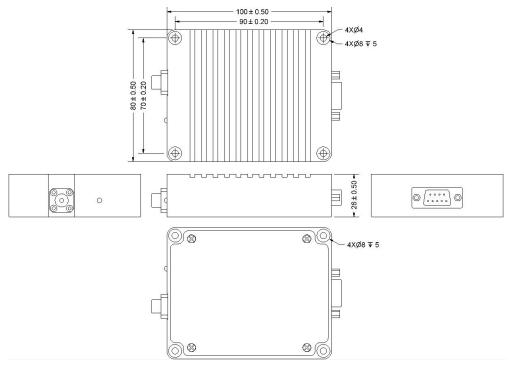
Mechanical drawing of module box (FC/APC connector with FC adaptor)
